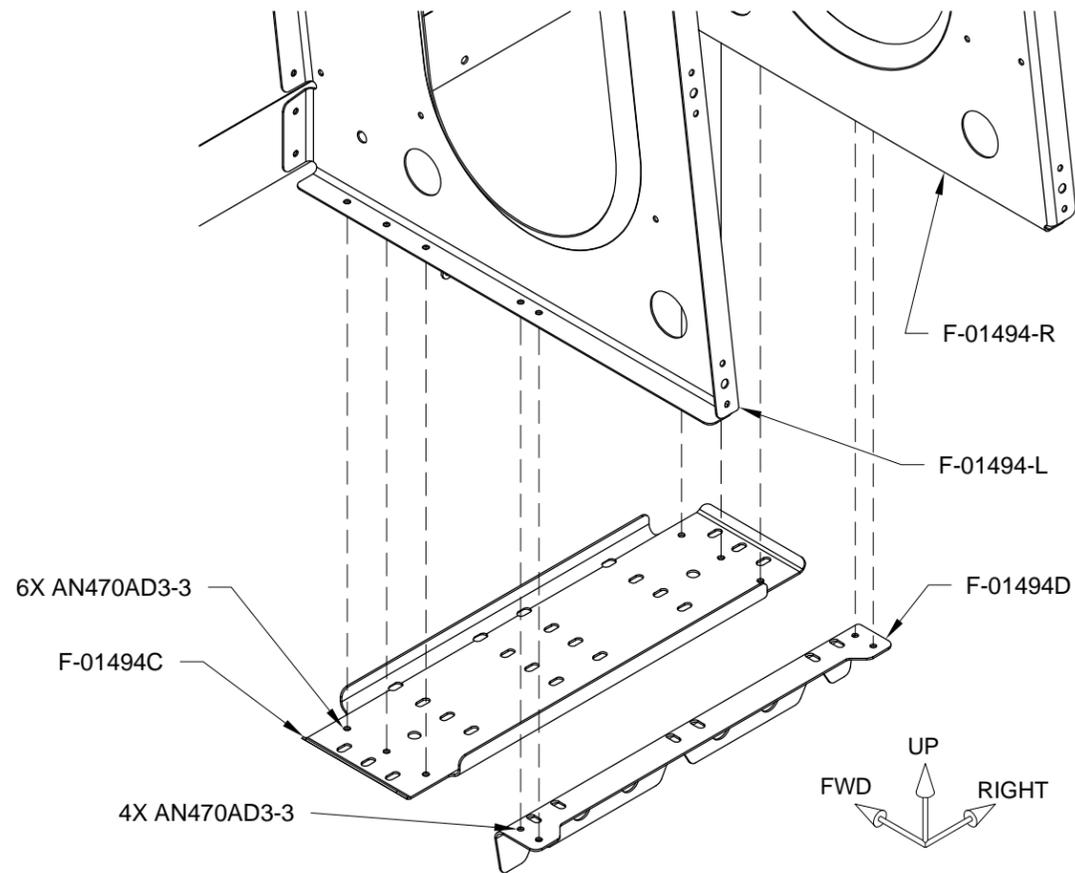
INSTALL WIRING CHANNEL & CABLE SUPPORT BRACKET
